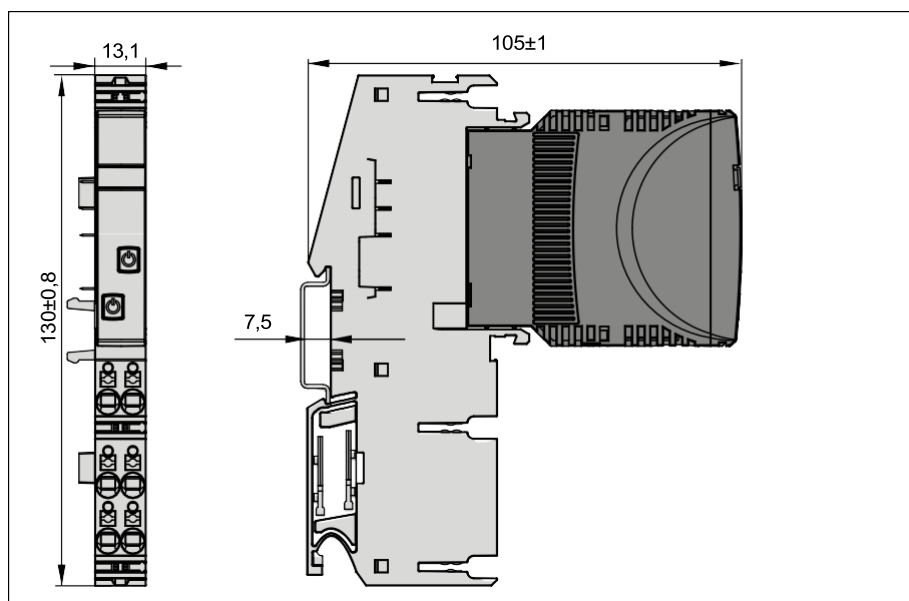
Dimensions of connection module 18plus-AM03 equipped with ESX60D
